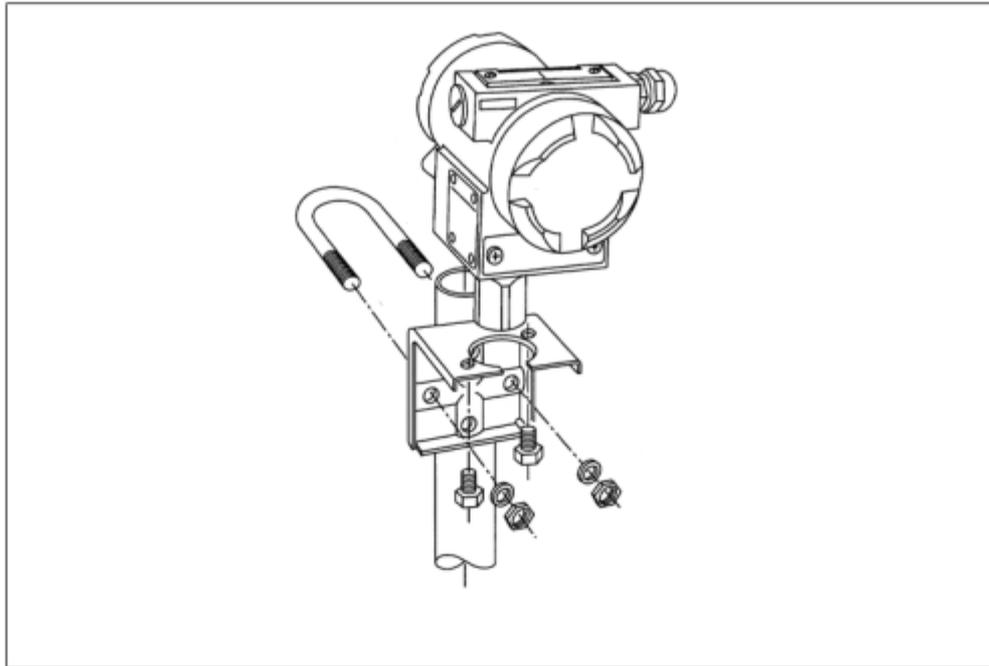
Mounting the SITRANS P, Series DS III PA transmitter, with mounting bracket
